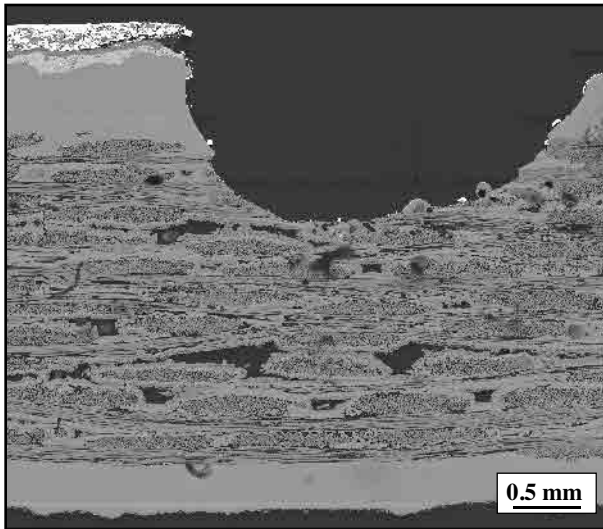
Cross-section SEM image through a "pinhole" defect formed from a tool bump near center of outer liner.
